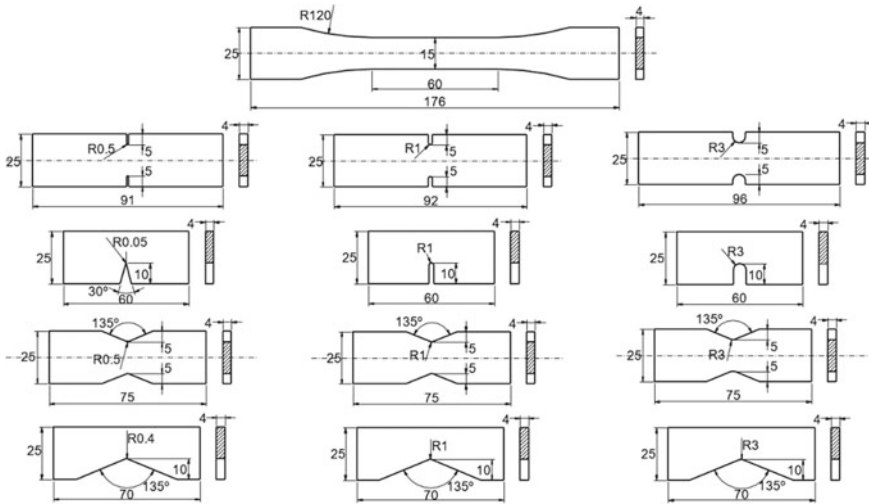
Geometries and dimensions (in millimetres) of the tested specimens [2, 5]
